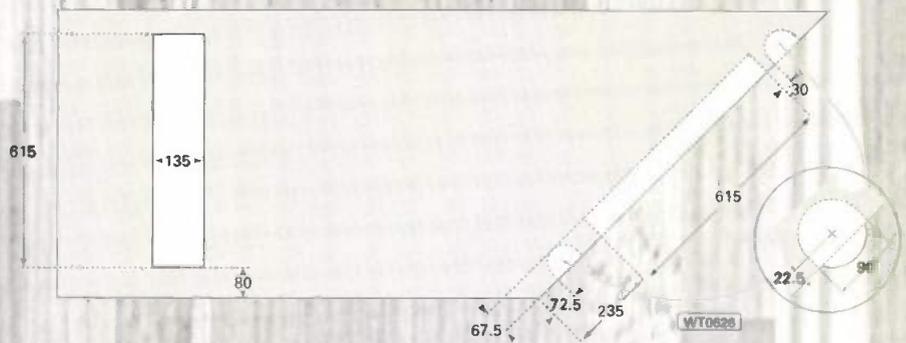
The layout for the bottom section, and again two similar pieces are required,
